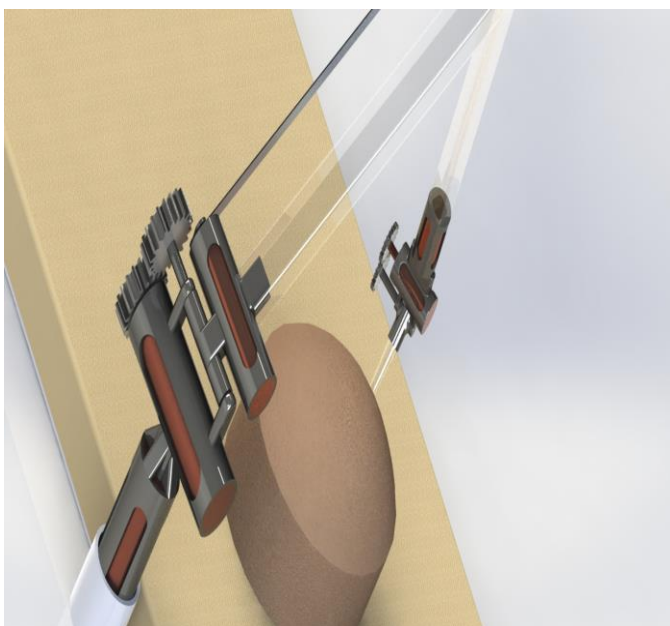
Slave Manipulator performing Ultrasound (View Of
